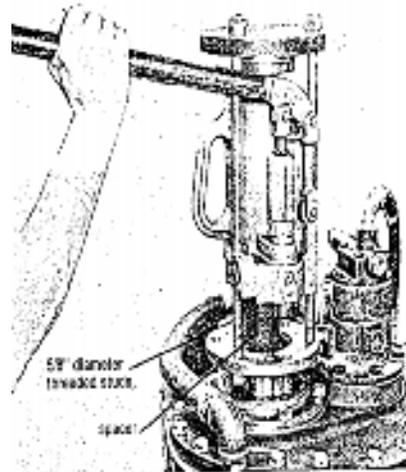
Pulling Out Coupling from Shaft Using Jack and Special Tool no. 1-90025-0003.
